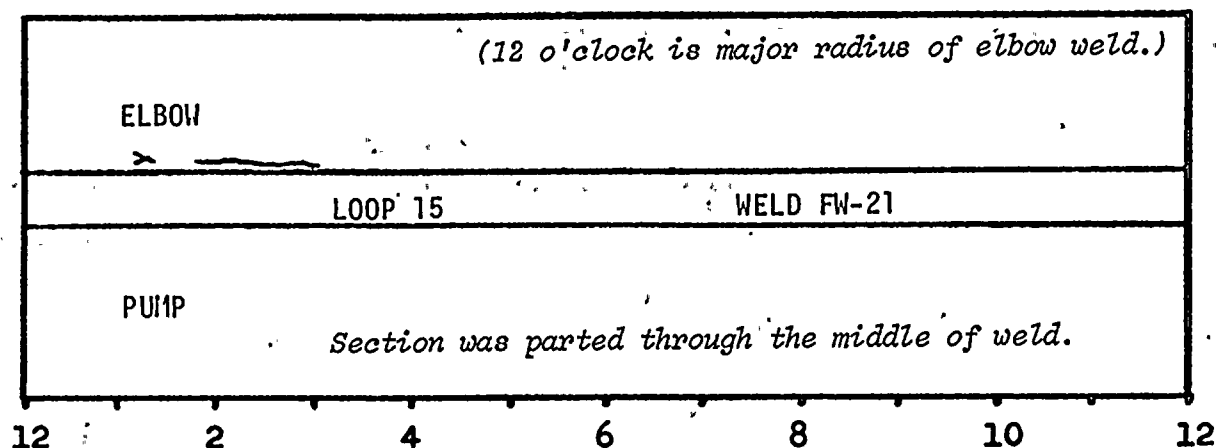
(Continued) Dye Penetrant inspection results, Loop 15 welds. (Refer to Figure 5 for weld locations.)
